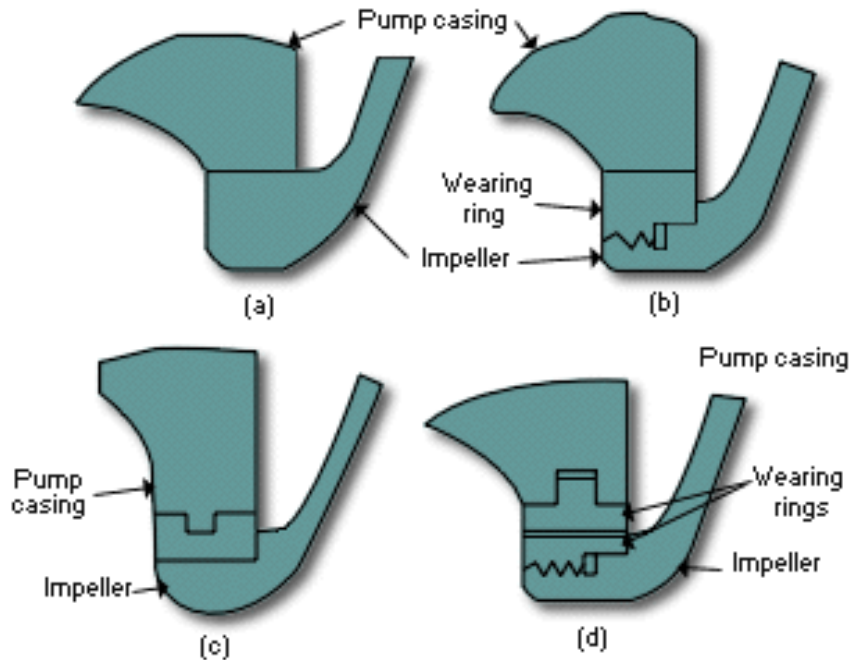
(a) illustrates the clearance space between the pump casing and impeller of a low cost pump without wearing rings. When wear enlarges the clearance to the point that the pump efficiency drops off drastically, both casing and impeller have to be replaced. Fig. 11(b) shows a single flat wearing ring threaded on the eye of the impeller, while in Fig. 11(c) a wearing ring is fitted onto a ridge on the casing. Both rings form a flat sealing joint similar to Fig. 11(a), but the wearing ring can be readily renewed to restore the original clearance. Fig. 11(d) shows the arrangement with renewable wearing rings for casing as well as impeller.
